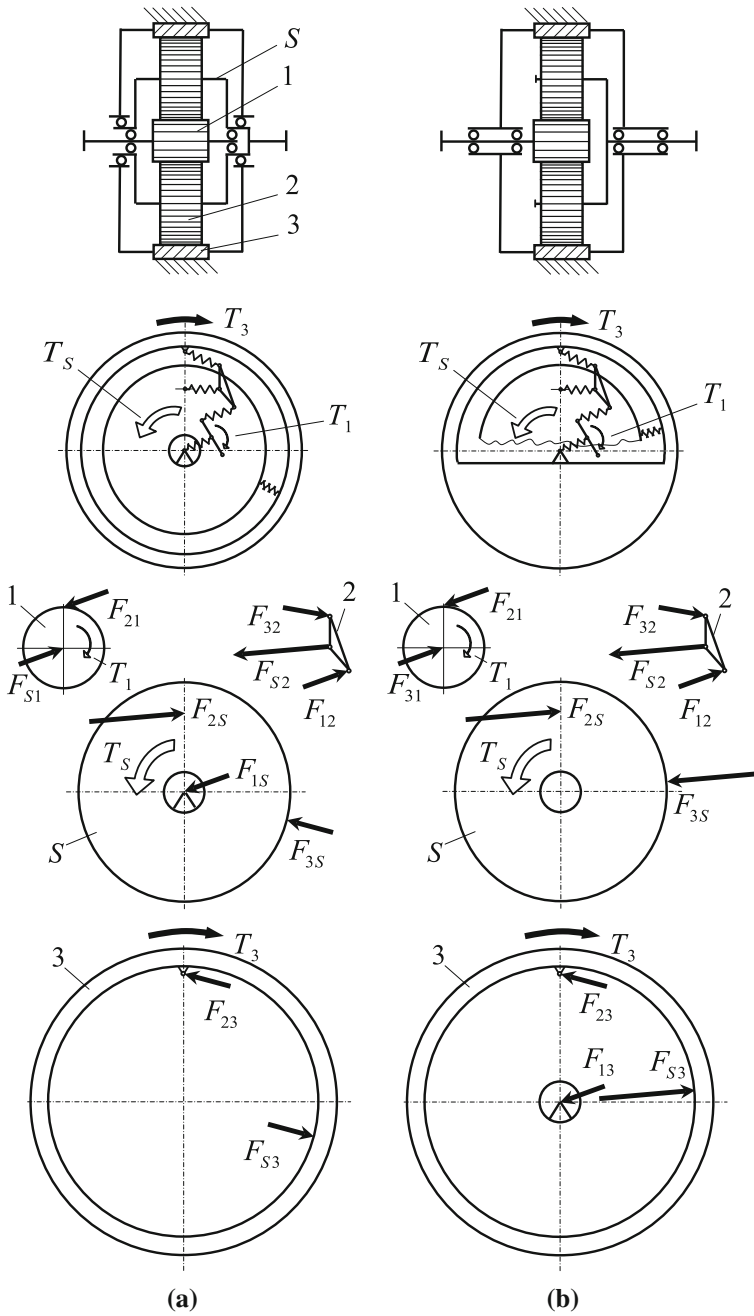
Different load of the elements of the gear train depending on the location of the bearing of the sun gear, leading to different impacts of different deflections a bearing in the carrier, b bearing in the housing
